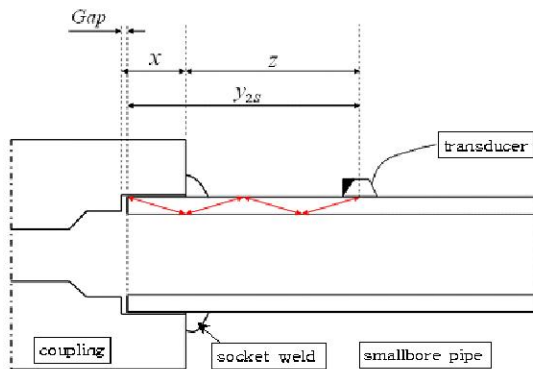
Principal of the Socket Weld Gap Measuring
